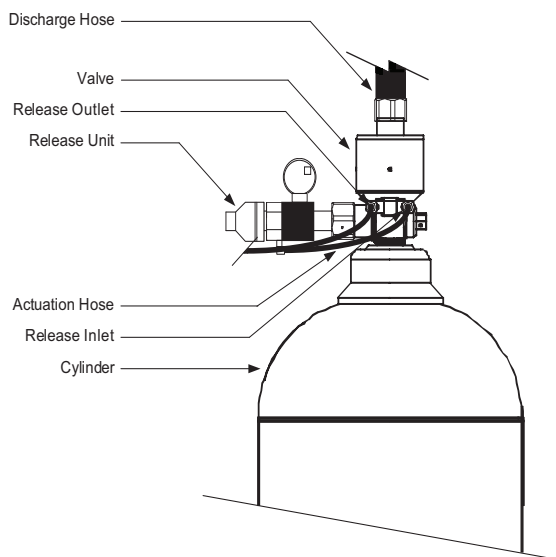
Typical Primary Cylinder/Valve Assembly (Rear View)
